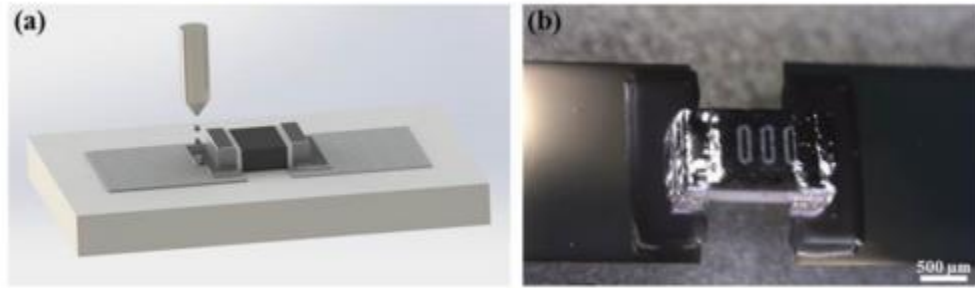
Fully ink assembly process which is limited to peripheral [17]
